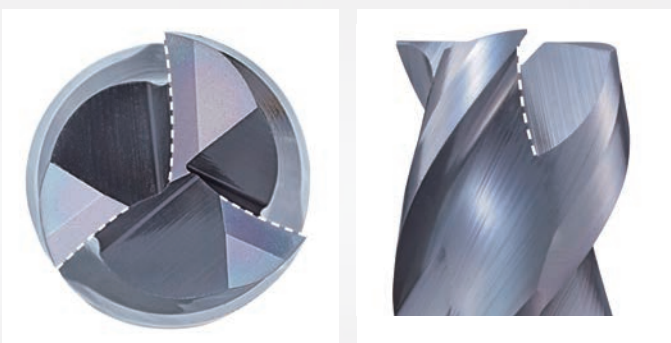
AE-VTSS's 3-flute specification and bottom cutting edge hook shape.
